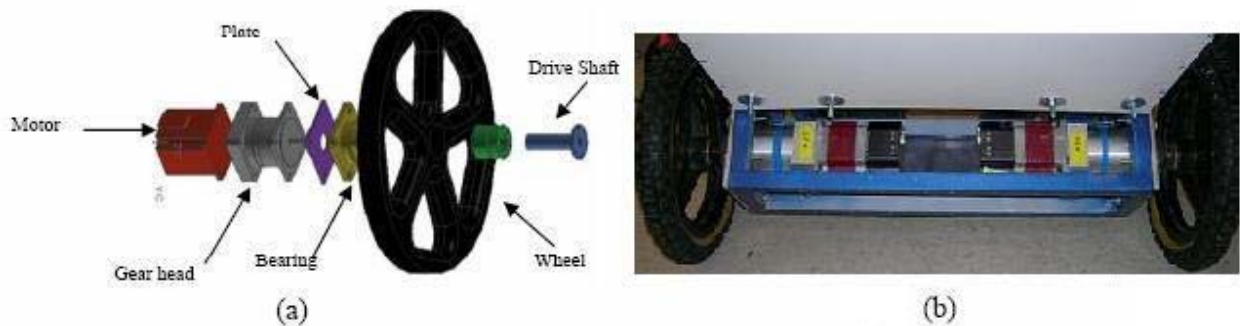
(a) CAD exploded view of the drive shaft assembly, (b) Reagle's drive train
